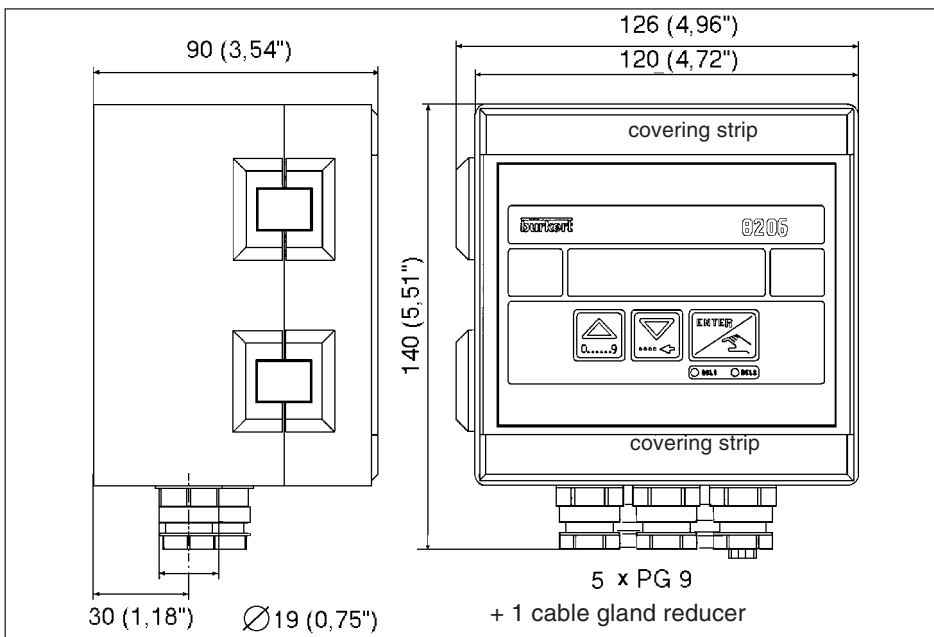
Dimensions redox transmitter type 8206 wall-mounted version
